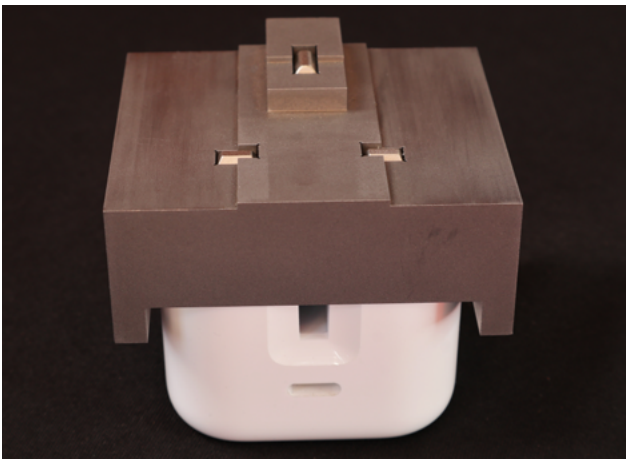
Example of genuine charger in a laboratory plug pin gauge from BS 1363-1 - Body shape and plug pin dimensions all within limits.
